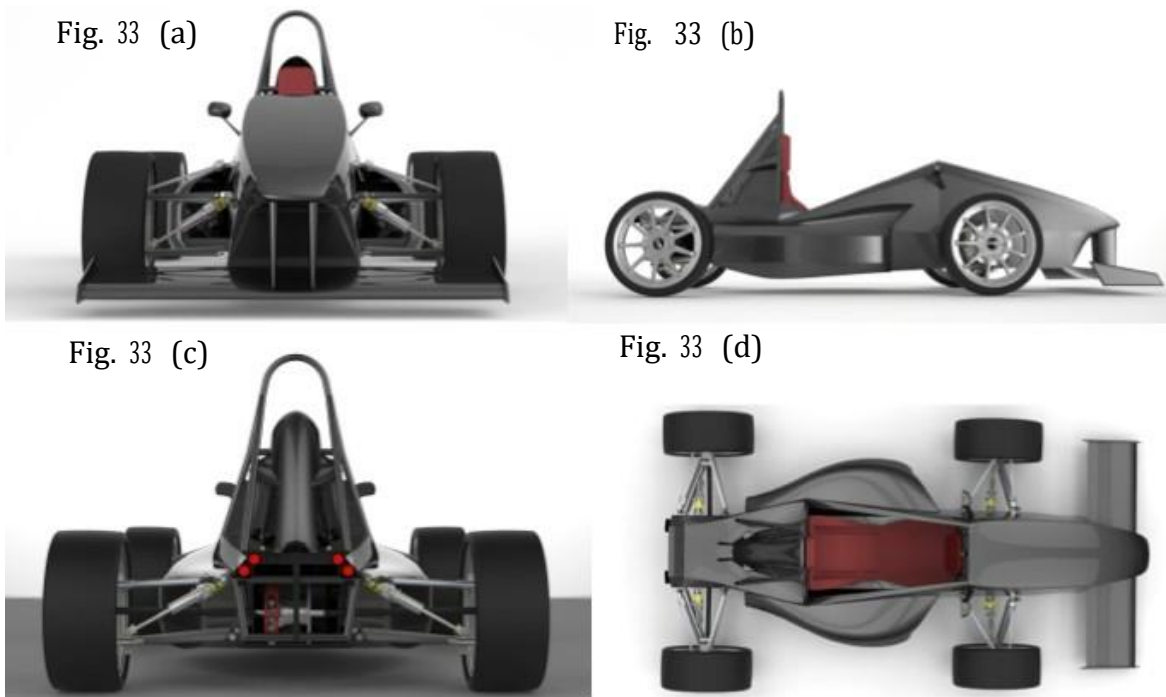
3D Modeling View; (a) Front View; (b) Side View; (c) Rear View; (d) Top View
